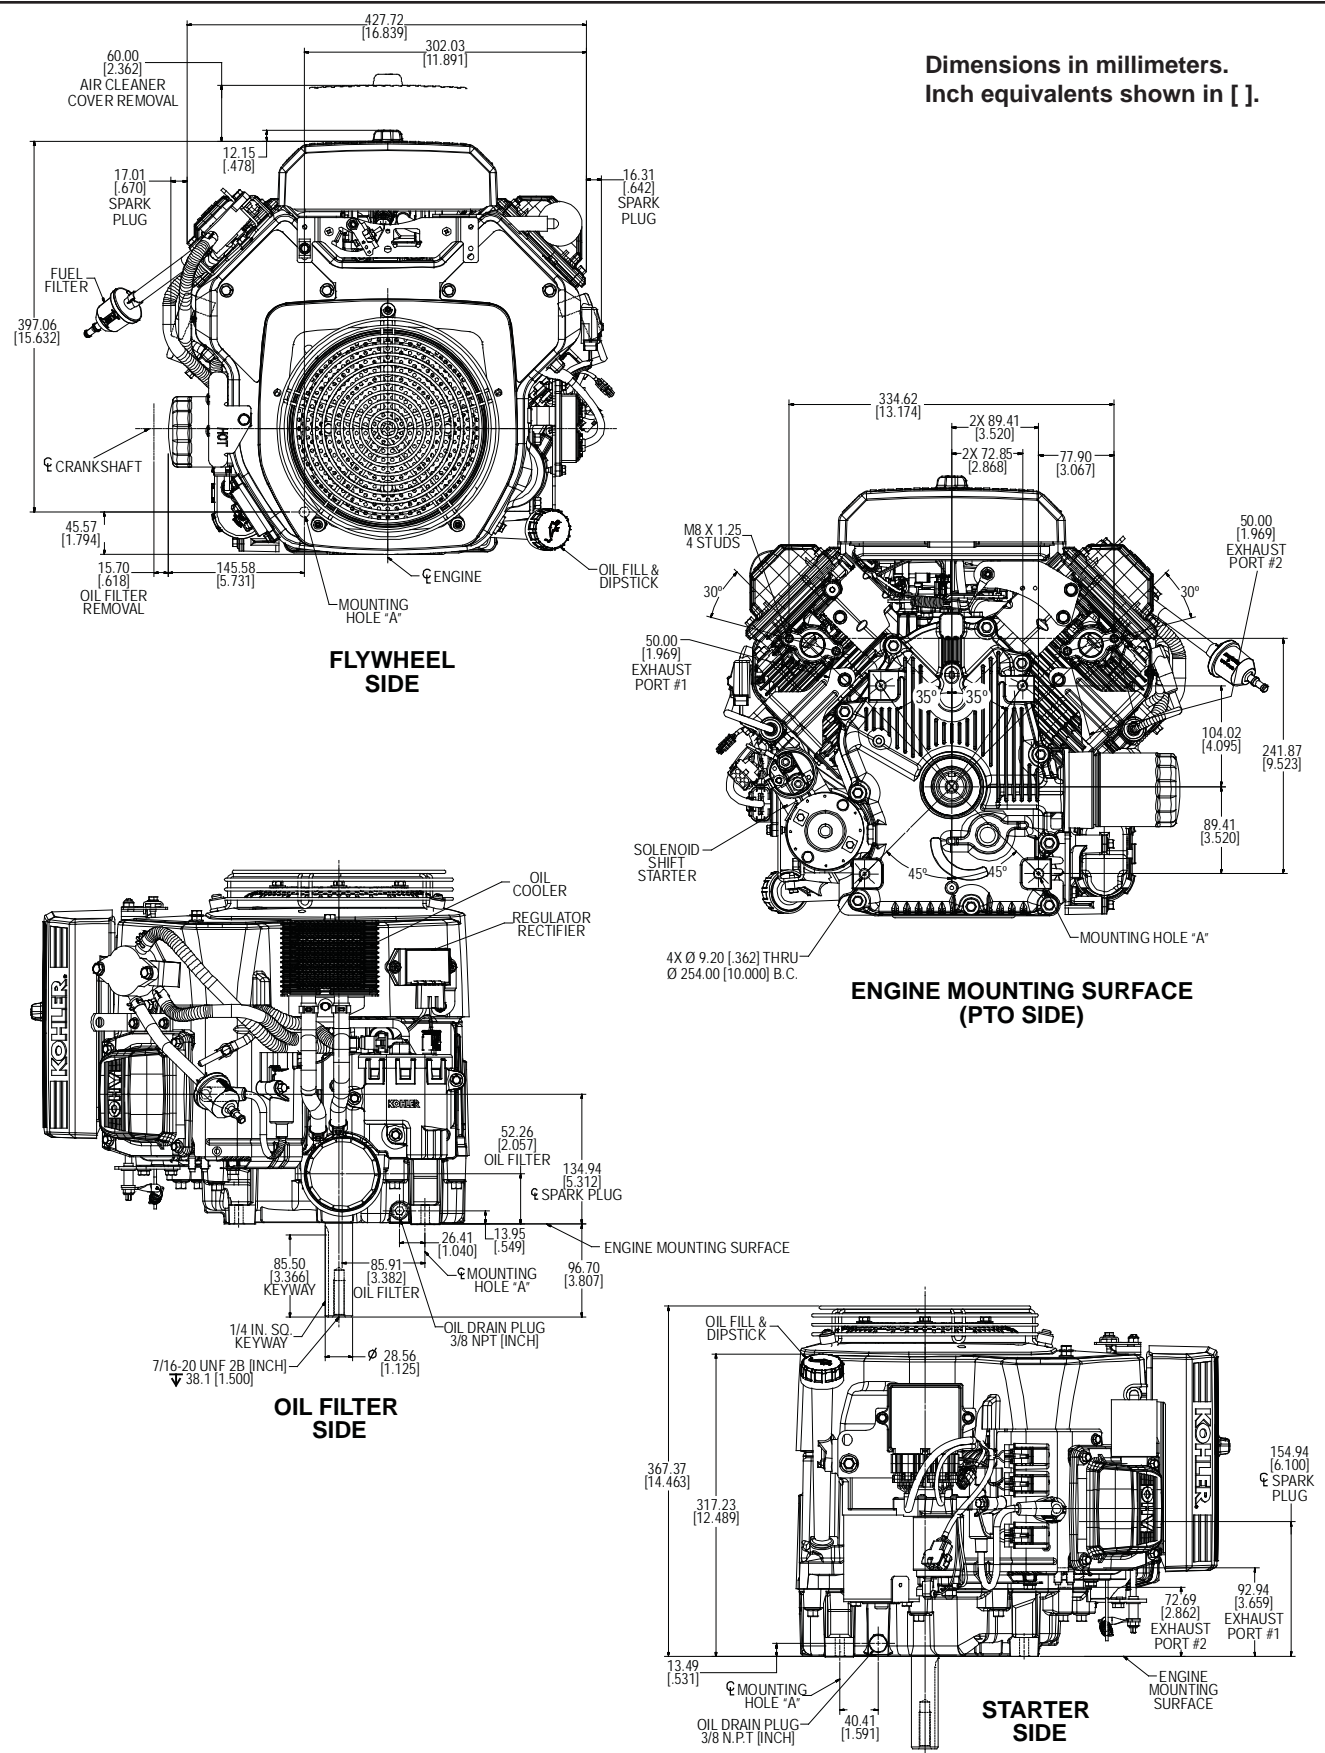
Typical Engine Dimensions - ECV749 with Low-Profile Air Cleaner.
